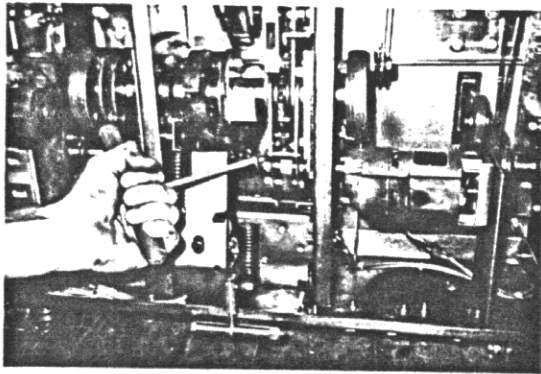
Support Vacuum Interrupter Assembly at the Insulator. Remove Top Mounting Bolts. Remove Pole Unit Assembly
